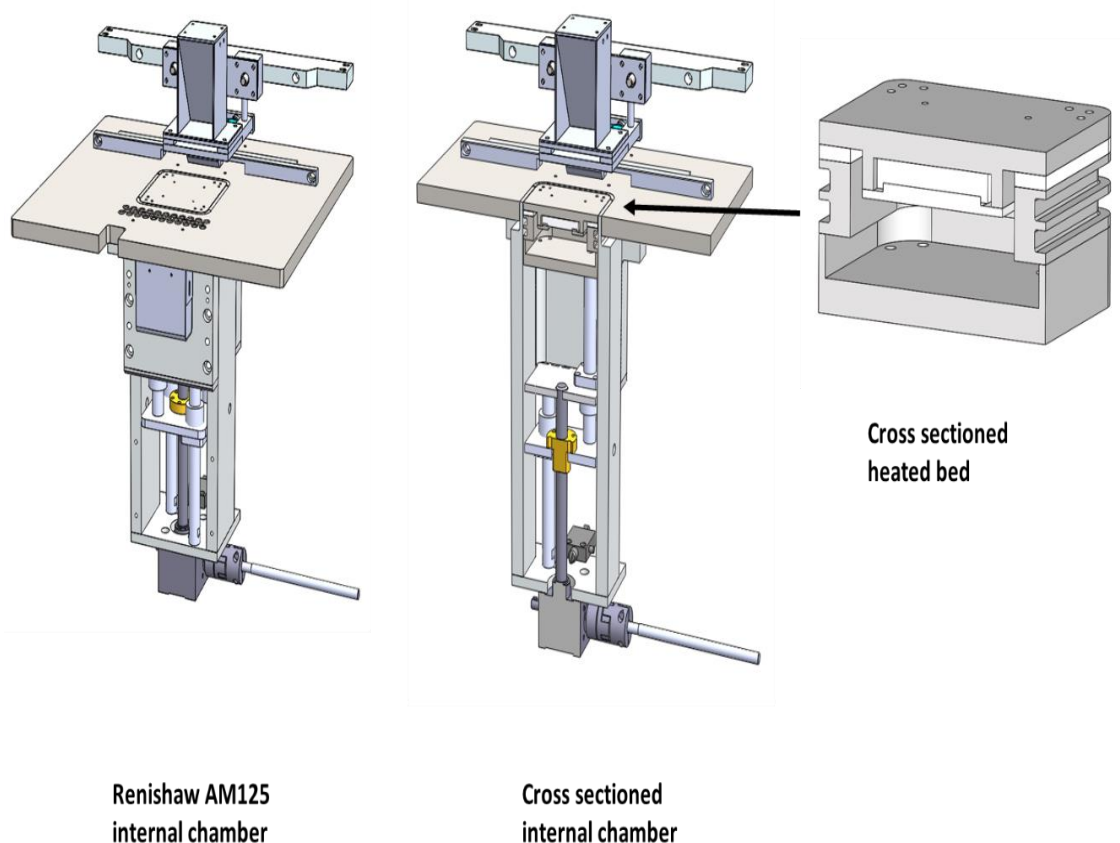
Schematic of heated bed assembly inside the Renishaw AM125.
